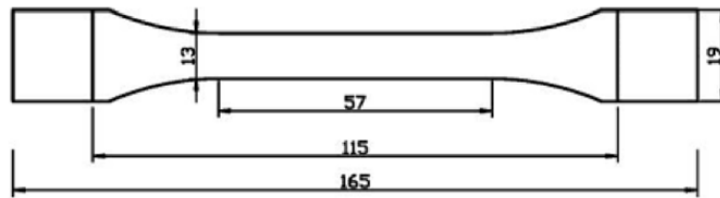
Dimensions for ASTM D638 Type-I sample. Sample thickness: 7mm.
